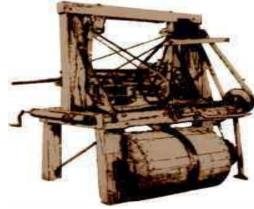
MAUDSLAY'S SCREW-CUTTING LATHE
